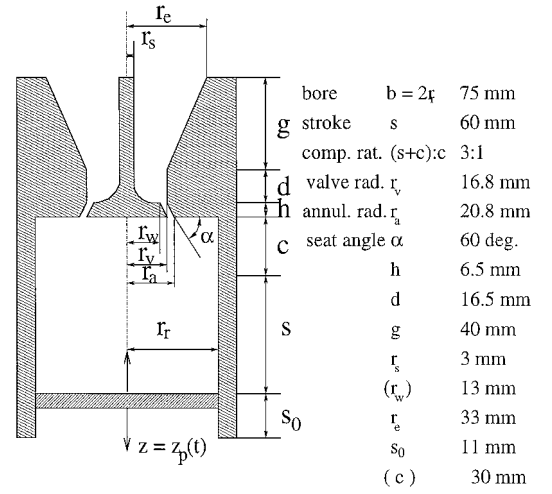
Axisymmetric piston-cylinder assembly of Morse et al.<sup>17</sup>
